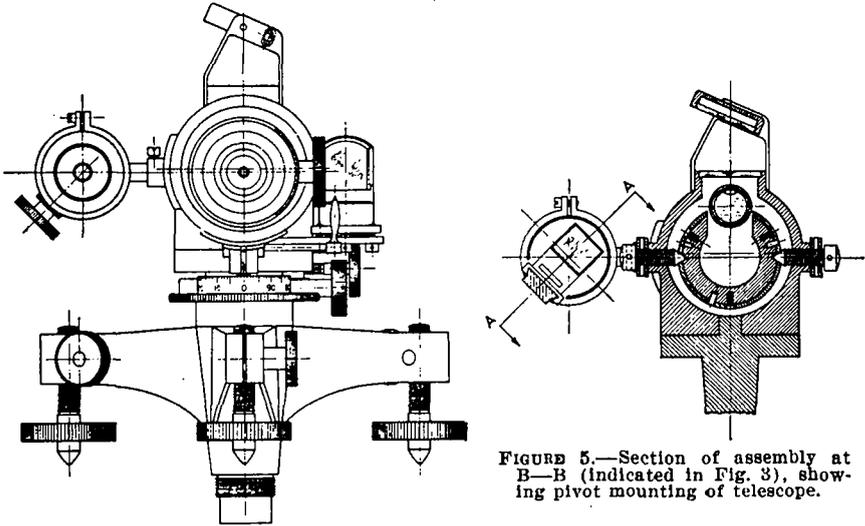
Section of assembly at B-B (indicated in Fig. 3), showing pivot mounting of telescope.
